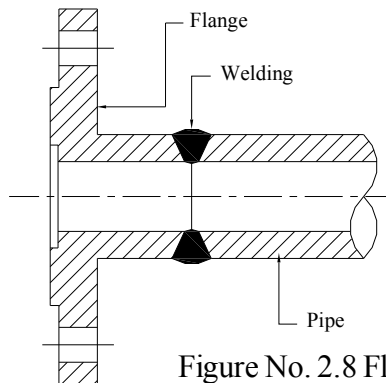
Flag Type Welded End Fittings
